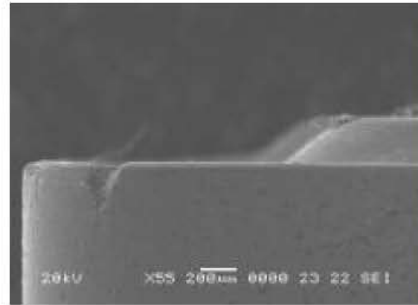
shows the photographs of tool edges after 10 min of machining at a cutting speed of 300 m min⁻¹ and a feed rate of 0.1 mm rev⁻¹. With an increase in depth of cut, the contact length of the cutting edge with the workpiece increases and wear occurs deeper along the cutting edge. It can be seen that the size and depth of the cracks on the cutting edge not only increase with an increase in feed, but they occur deeper away from the tip of the cutting edge. This is because, due to the increase in the depth of cut, chip width increases and the center of pressure of the chip on the tool face moves away from the tool nose.
